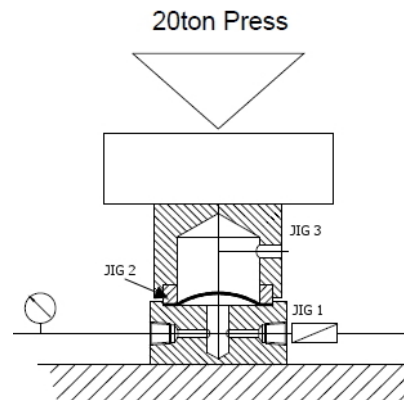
Schematic Diagram of Dimple Forming Test Set-up
